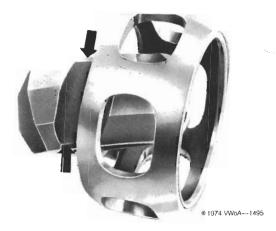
Ball hub being removed from or installed in the ball cage. Arrows indicate the alignment of the ball hub groove with the ball cage edge.
